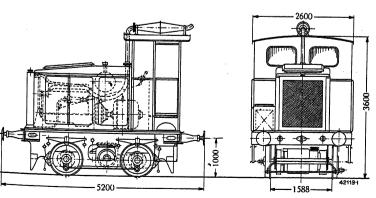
Diesel-electric shunting locomotive, 82/90 H. P.
